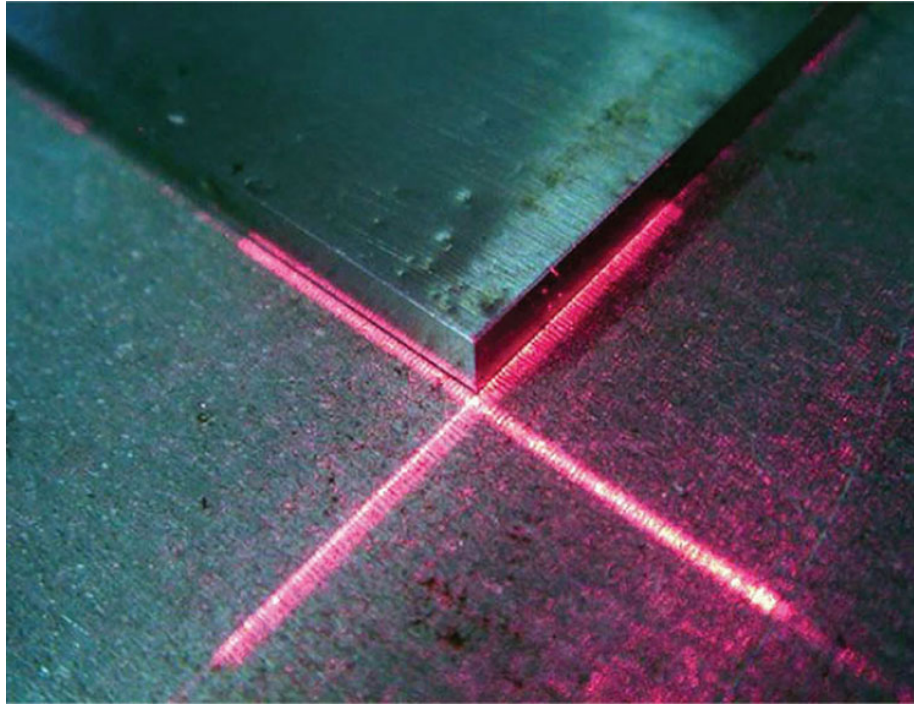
A Laser Centre/Edge Finder with a cross-hair polarizing lens being used to align the corner and edges of a workpiece. (Photo: SDA Manufacturing)
